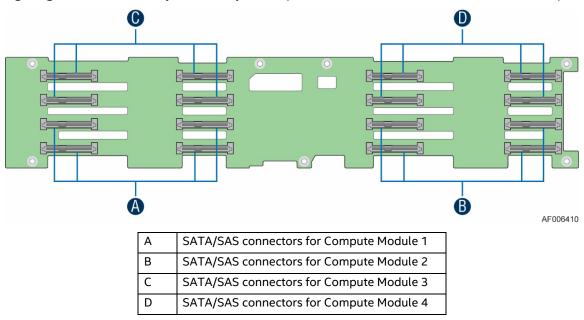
2.5" Backplane Component and Connectors (Front View)
